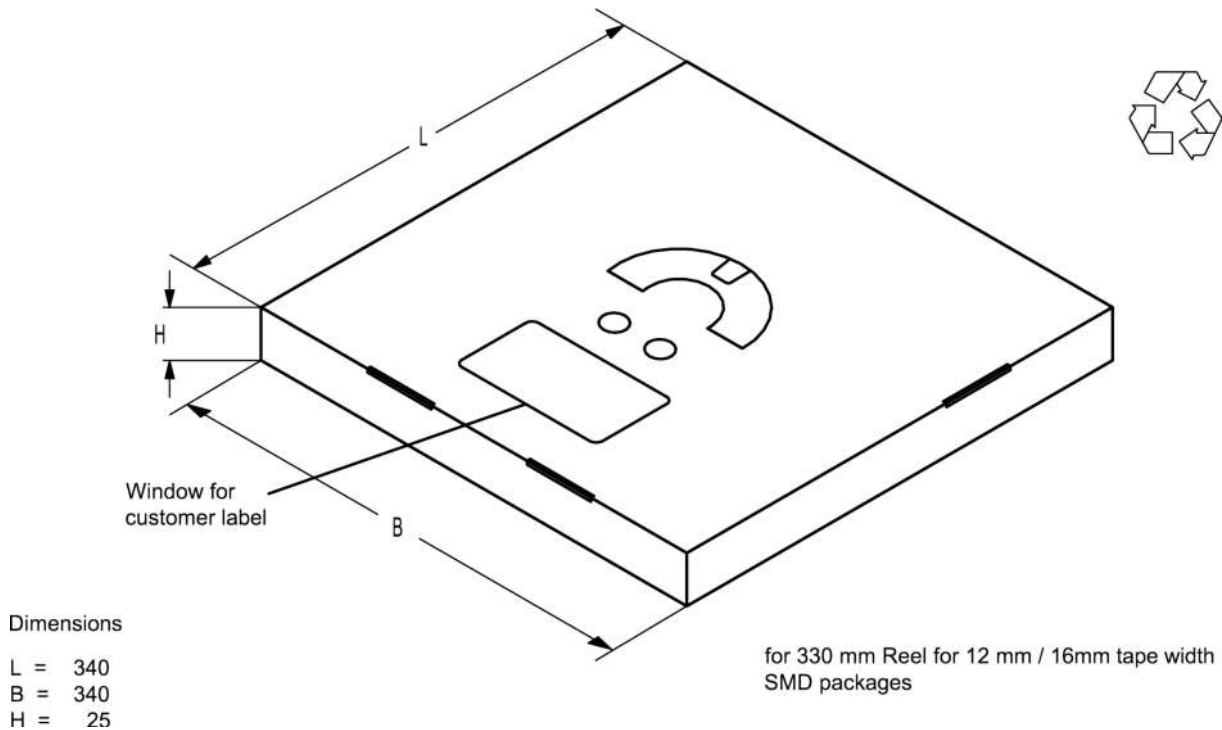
Drawing of folding box for reel with diameter of 330 mm.
